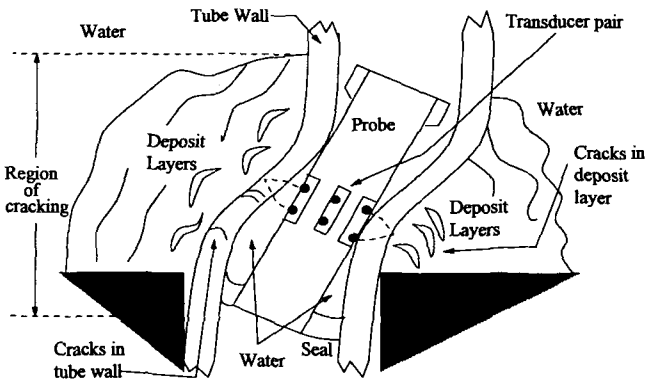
Geometry of ultrasonic NDE of the steam generator tube
